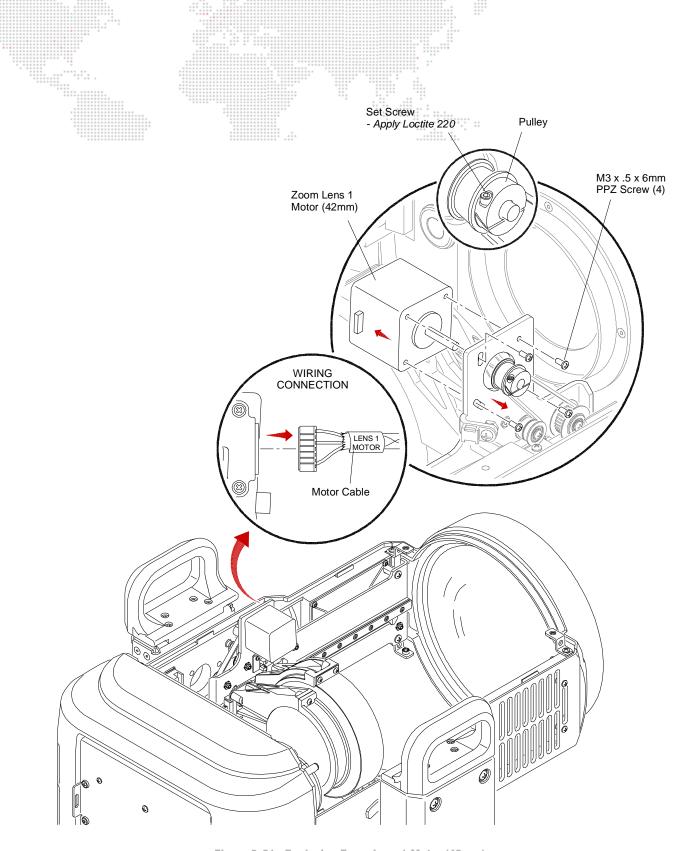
Replacing Zoom Lens 1 Motor (42mm)
